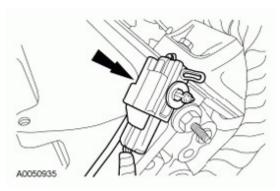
Locating Engine Oil Pressure Switch Electrical Connector And Wiring Harness Retainer Courtesy of FORD MOTOR CO.
